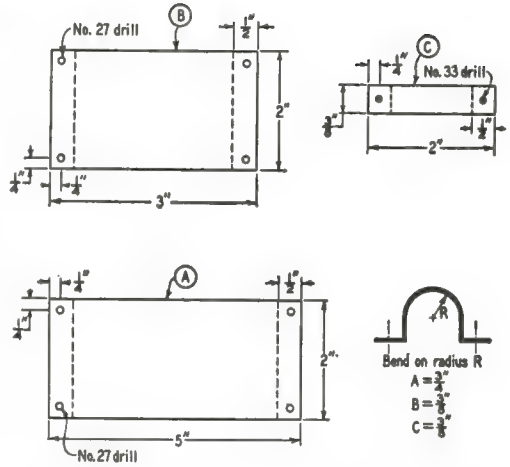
Detail drawings of the clamps used to assemble the all-metal 2-meter array. A, B and C are before bending into "U" shape. The right-angle bends should be made first, along the dotted lines as shown, then the plates may be bent around a piece of pipe of the proper diameter. Sheet stock should be 1/16-inch or heavier aluminum.
